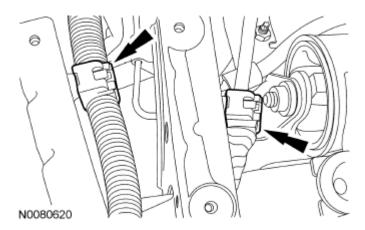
Locating Wiring Harness Retainers On Battery Tray Bracket Courtesy of FORD MOTOR CO.
